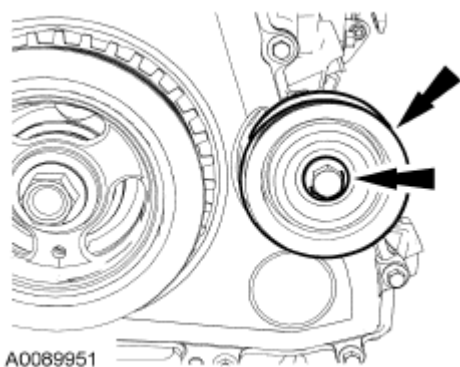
Locating Bolt & Accessory Drive Belt Idler Pulley
